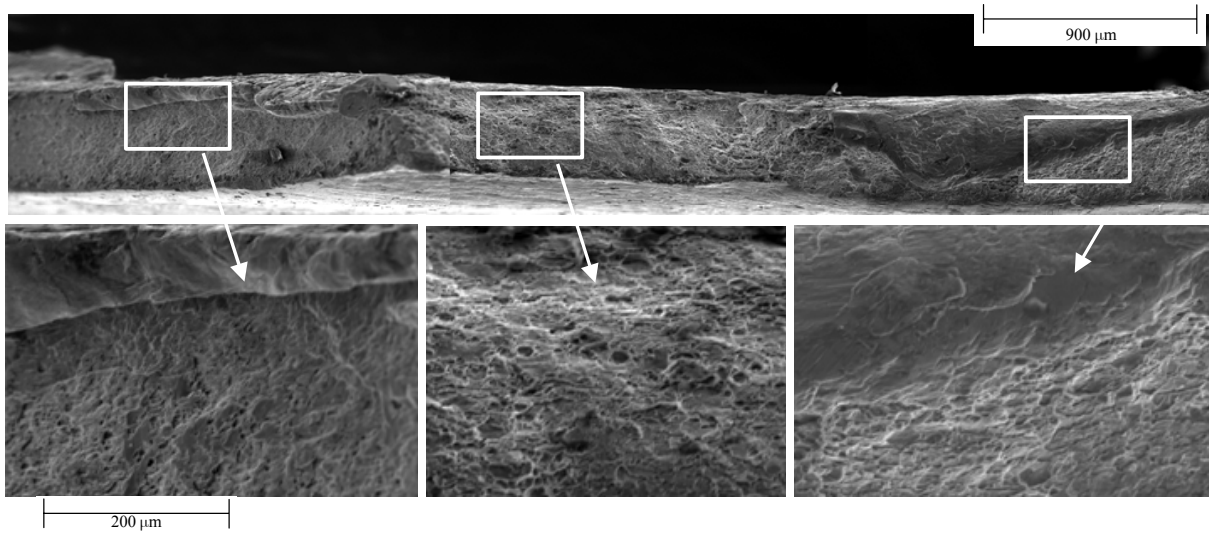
Fracture surface of a tip fracture in an AA5754 sample formed into a 45° cone.
